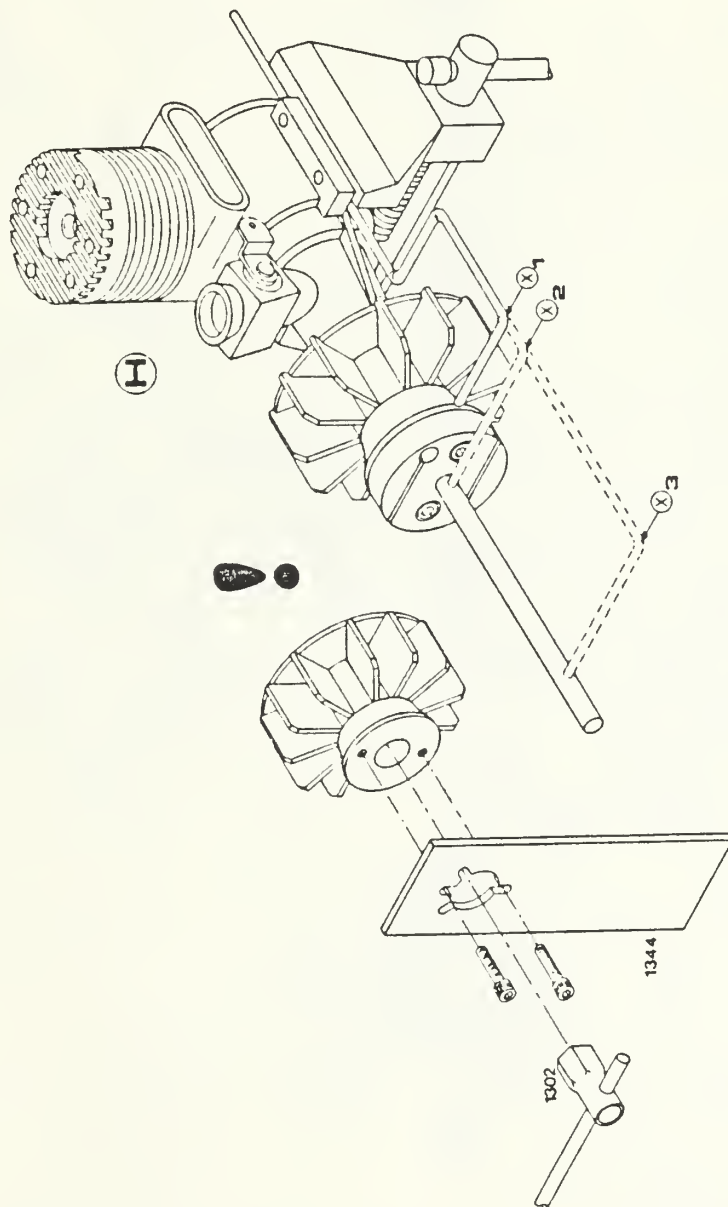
Cooling Fan, Clutch & Starter Shaft Assembly
